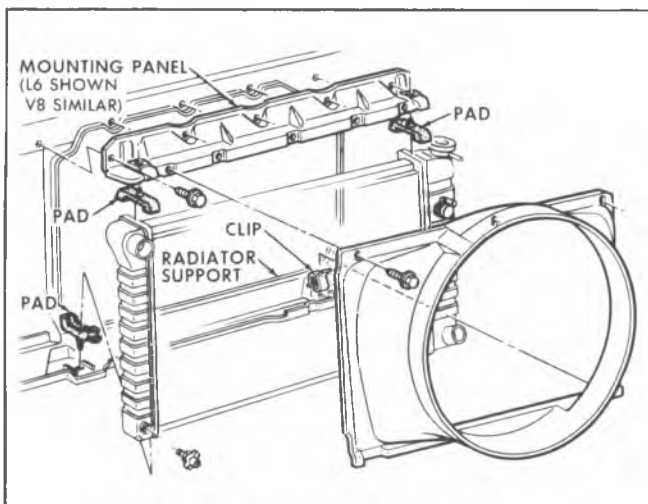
Radiator and Fan Shroud - CK/P30(42)
